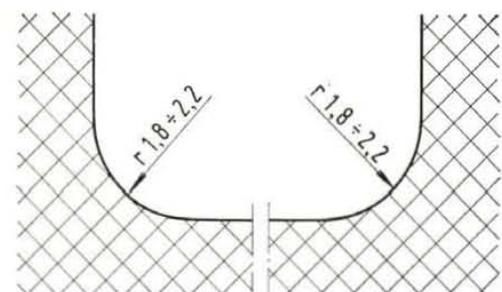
Fillet radii for connecting rod bearing journal shoulders.
